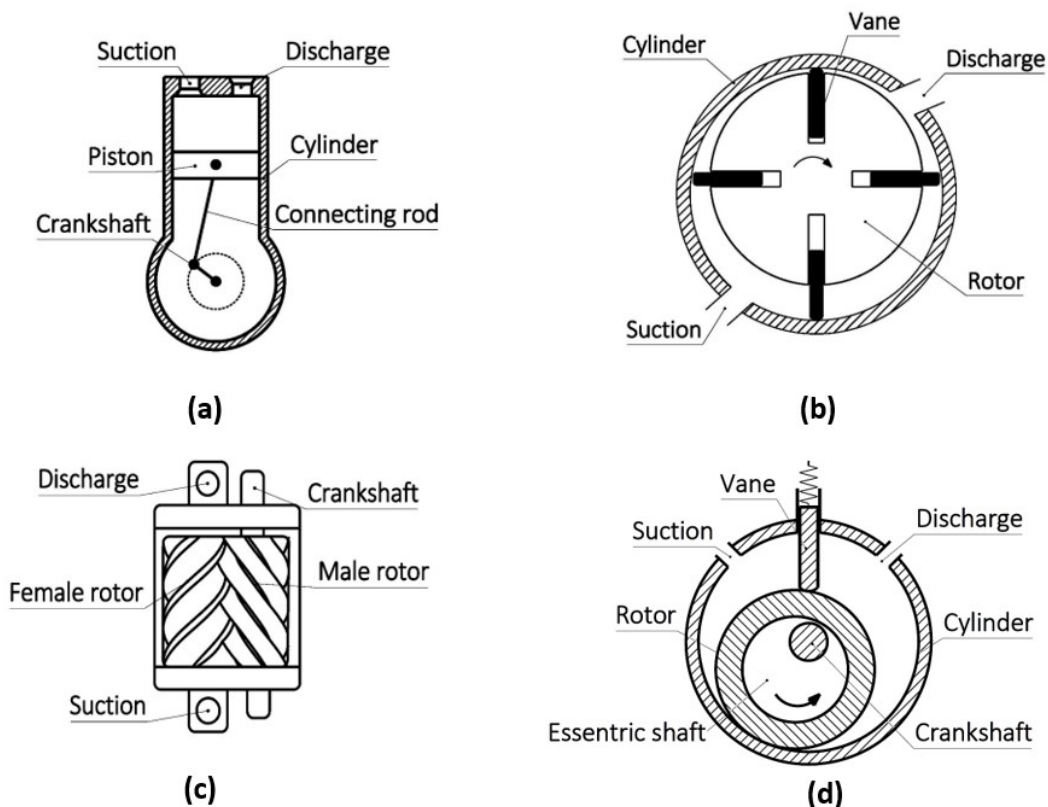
Common mechanisms of positive displacement compressors. (a) Reciprocating piston; (b) Vane-type; (c) Screw-type; (d) Rolling piston type.
